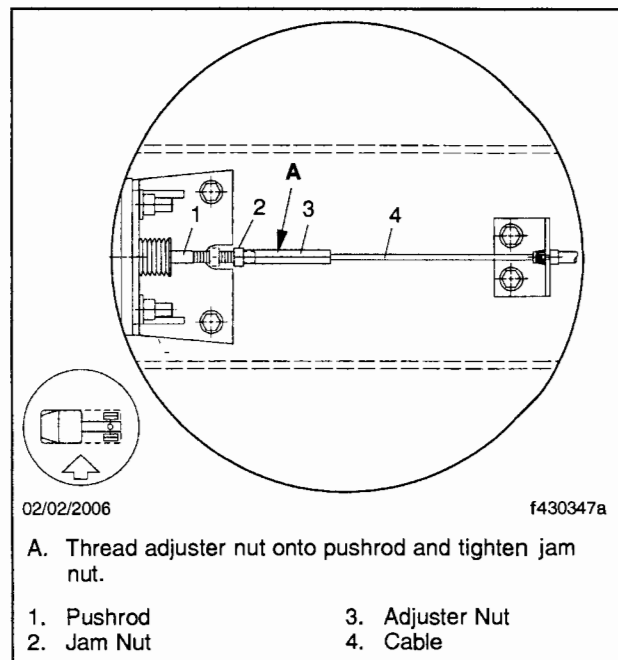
, Air-Actuated Parking Brake Cable Adjustment
